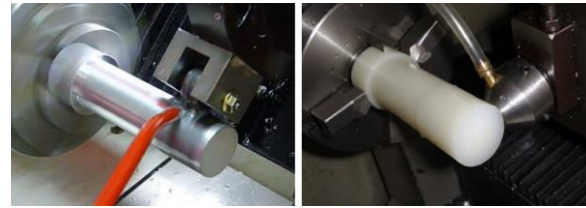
Ball burnishing (left) and roller burnishing (right).
